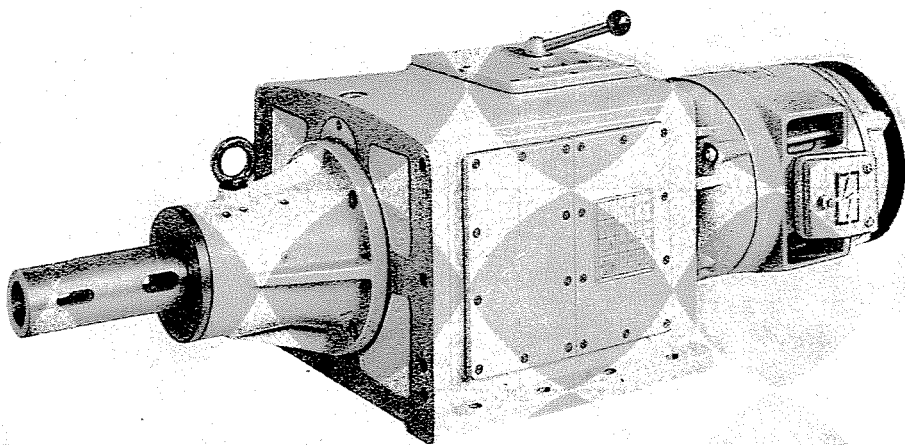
Type FE 40 Drilling Unit with single-spindle attachment
